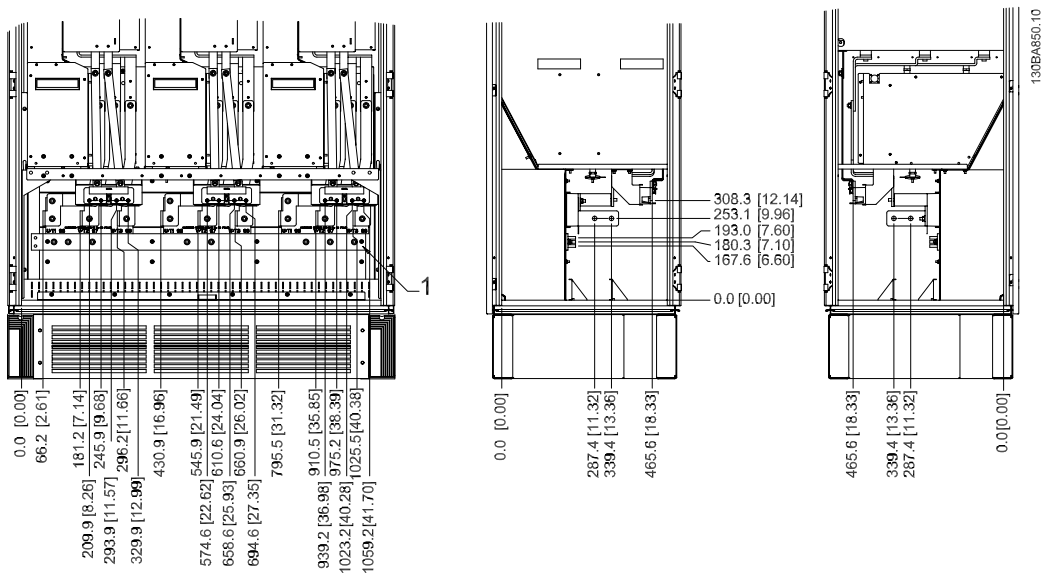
Terminal locations - Inverter Cabinet - F2 and F4 (front, left and right side view)
